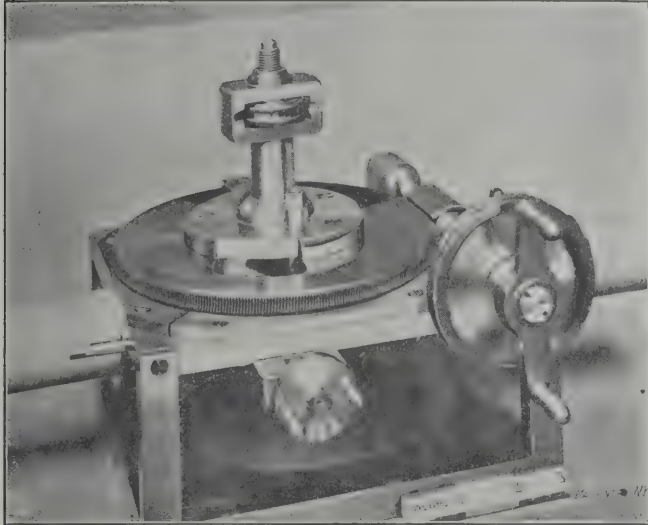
Maudslay's Machine for Originating Screws (About 1800)
